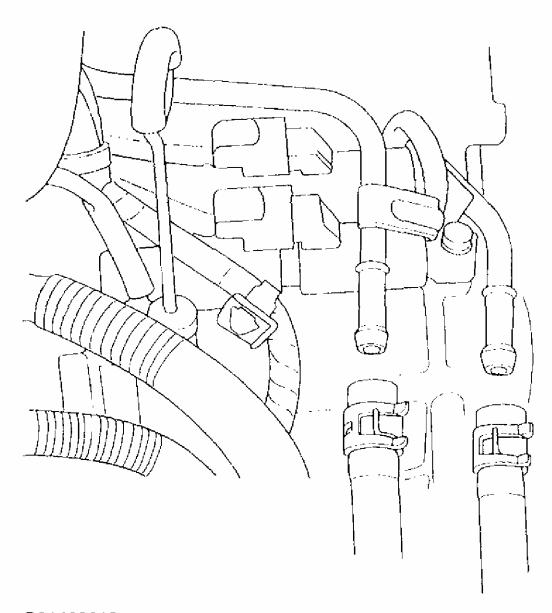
Removing The Upper Radiator Hose, Lower Radiator Hose & Ground Cable Courtesy of AMERICAN HONDA MOTOR CO., INC.
